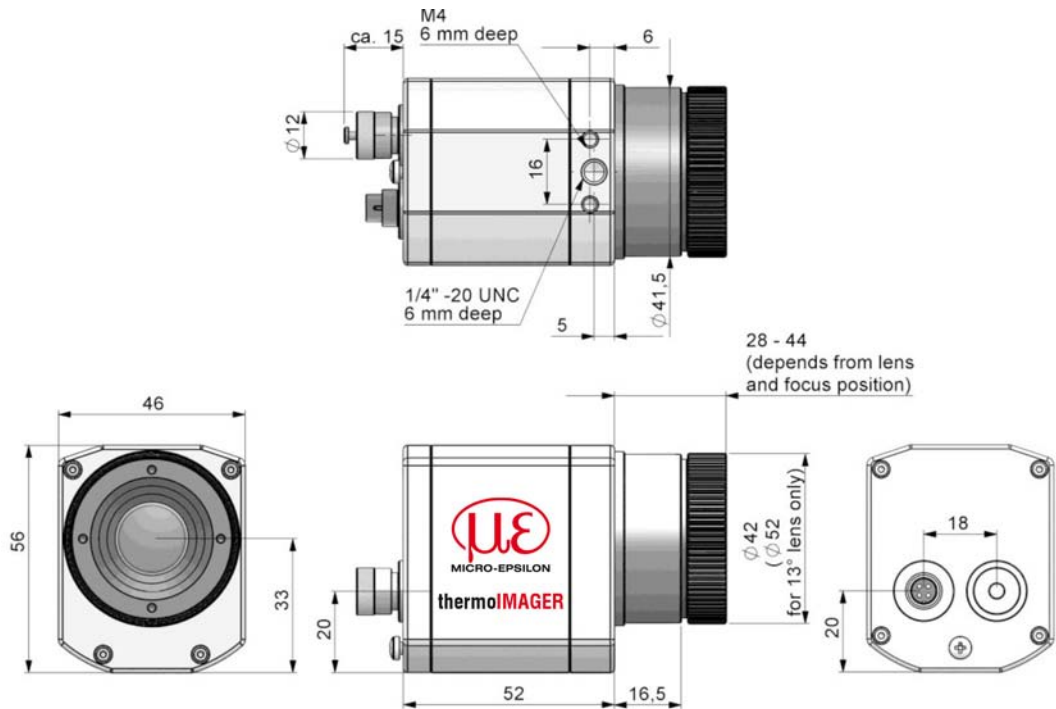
Dimensional drawing TIM 400 / 450 / G7 / 640, dimensions in mm, not to scale
